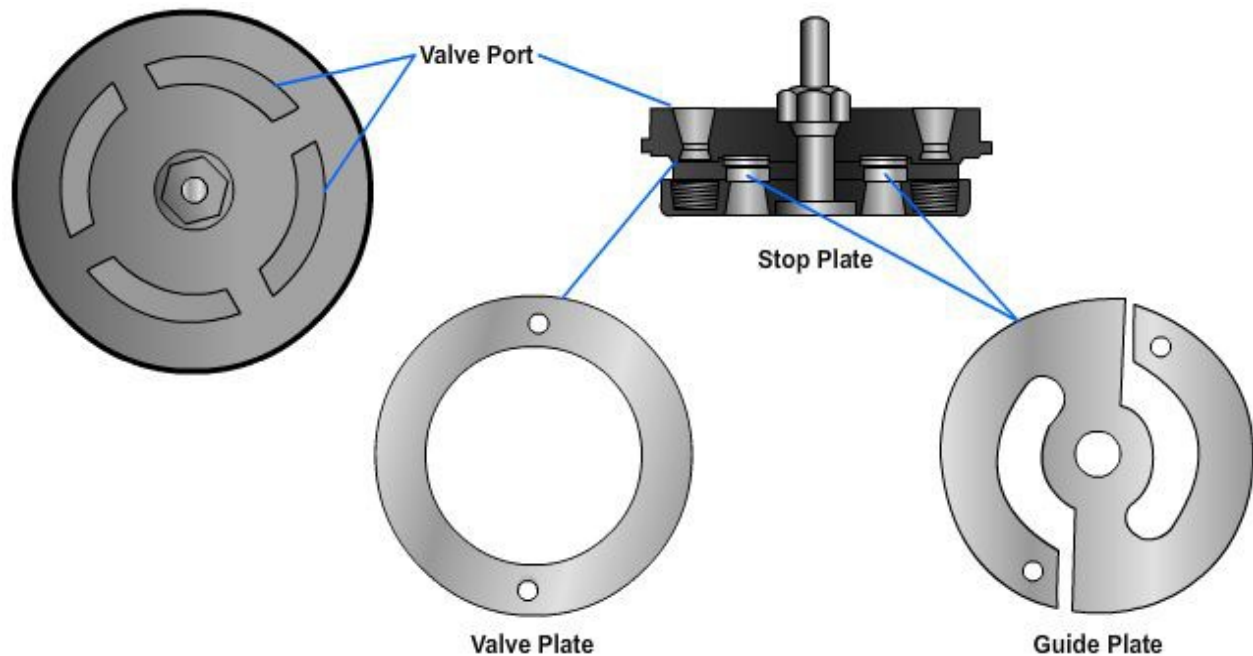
Thin plate, low lift, compressor valve assembly.
